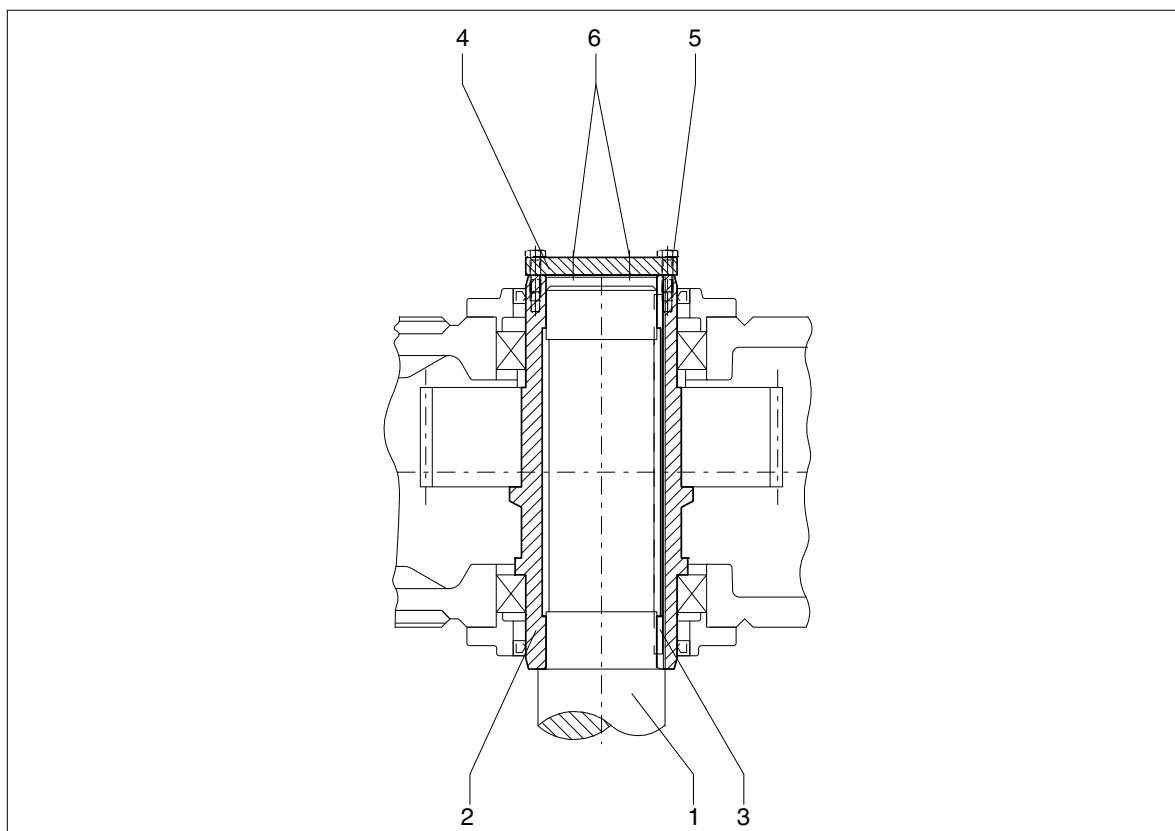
Hollow shaft with parallel keyway, demounting with end plate
